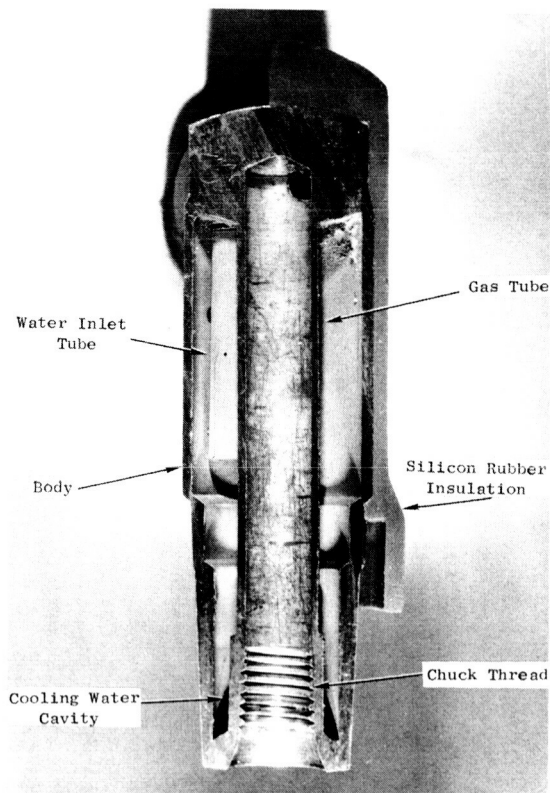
Internal construction of water-cooled TIG welding torch.
